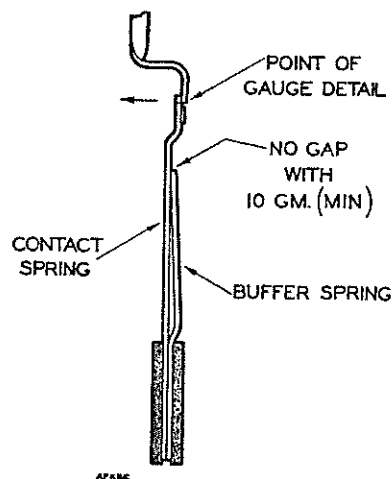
METHOD OF MEASURING BUFFER TENSION
